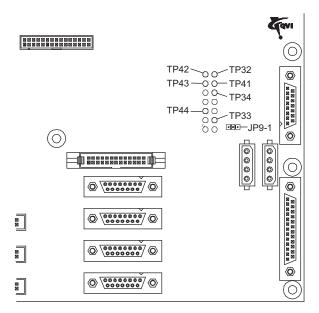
Location of the Joystick Troubleshooting Test Points on the DSP Multi Axis PCBA
